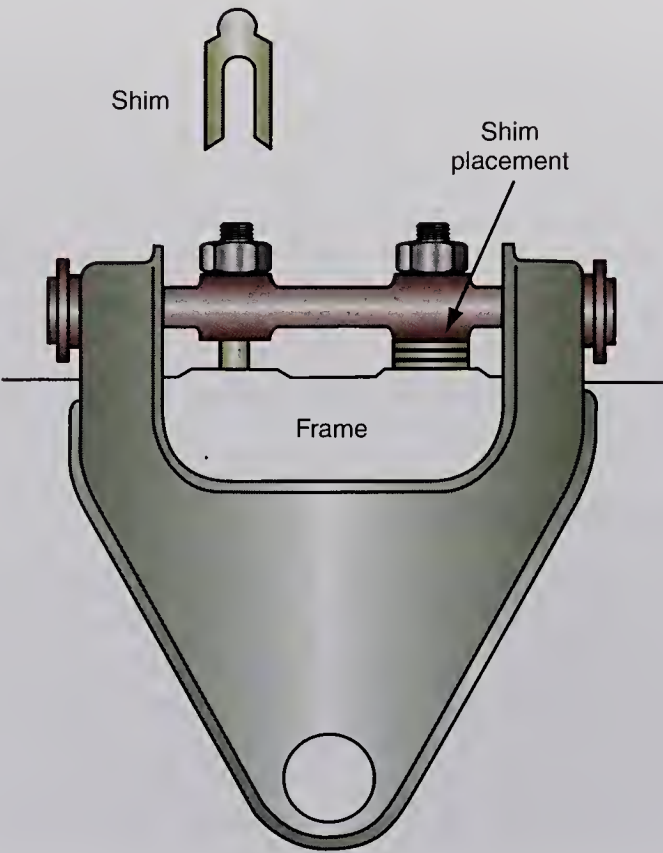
Shim-type camber adjustment between upper control arm mounting and the inside of the frame.
